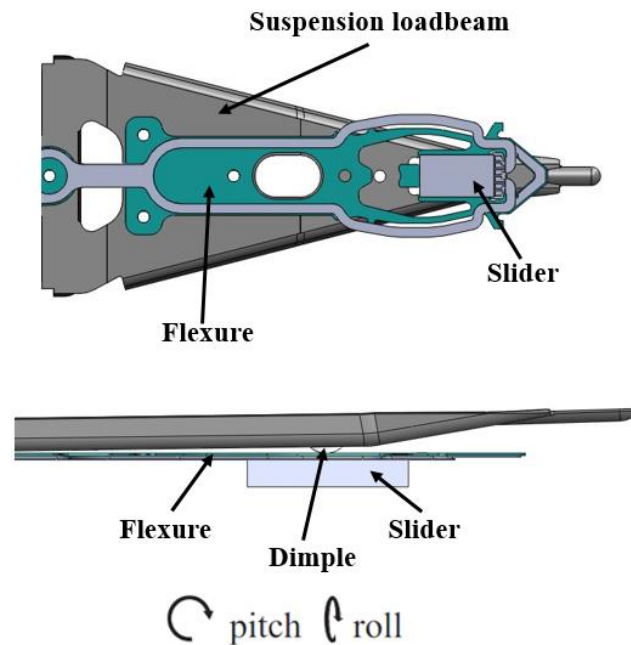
Suspension Assembly, front view (top); side view (bottom)
